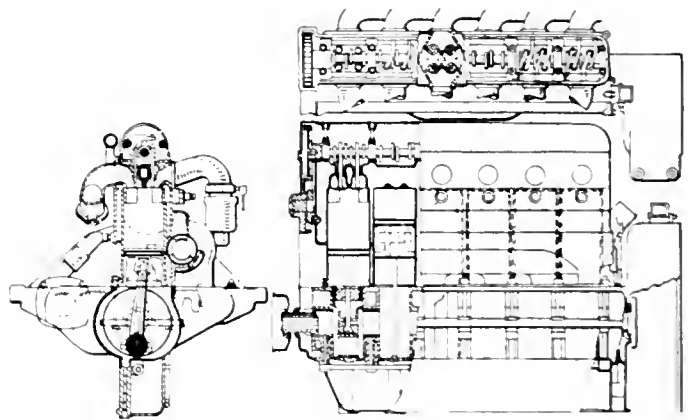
Specially Designed Engine which is Supercharged by Pressure Developed in the Crankcase
